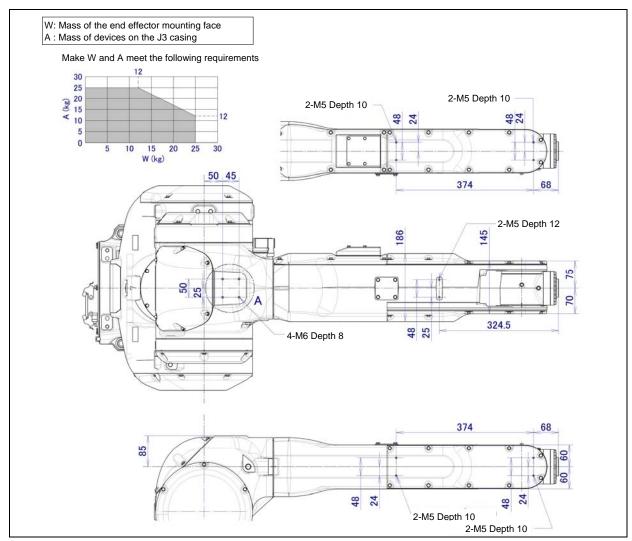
(c) Equipment mounting faces (3/3) (M-20*i*B/25/25C)
